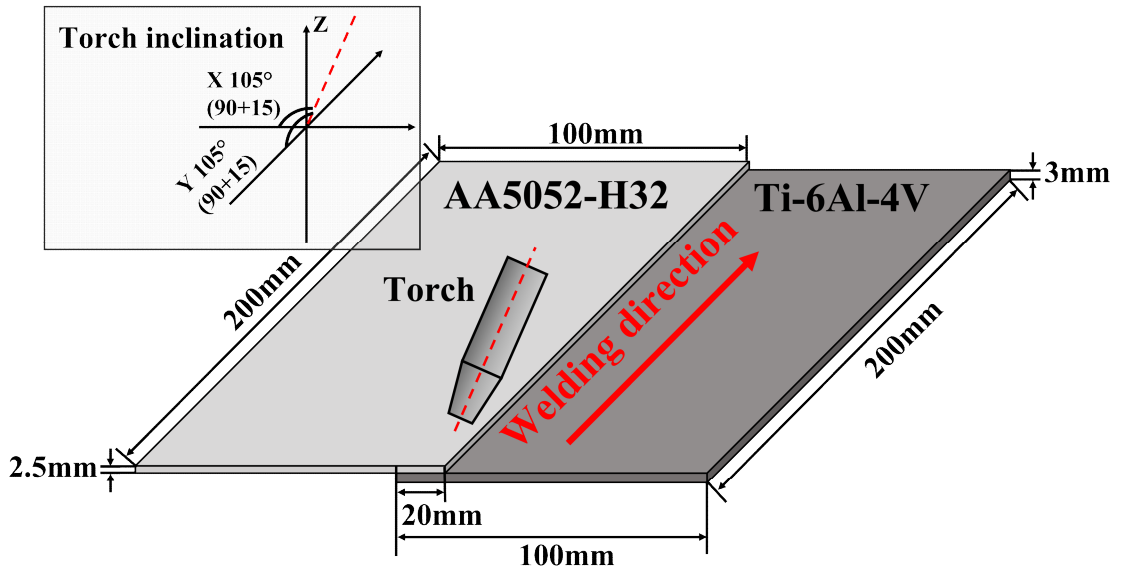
Schematic of AA5052-H32 and Ti-6Al-4V welded joints specimen
